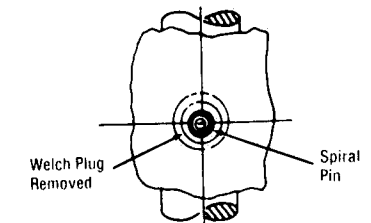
INSTALLATION OF SPIRAL PIN BUTTERFLY VALVE.
